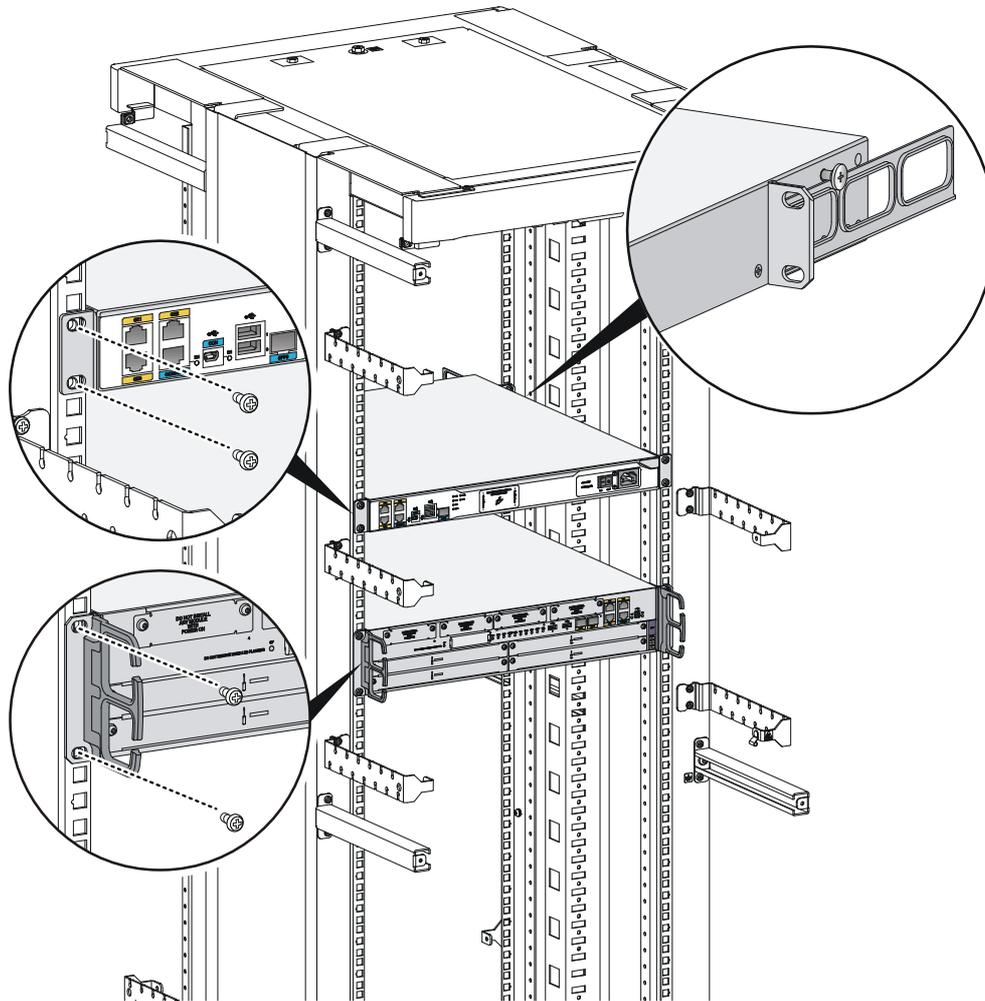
Attaching the front mounting brackets and load-bearing screws to the MSR3064
